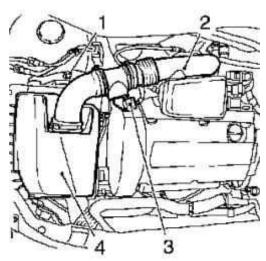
Components, shooting in the dismantling of the air filter: 1 - attachment bolt, 2 - inlet manifold, 3 - the wiring harness connector sensor mass air flow, 4 - air filter housing
